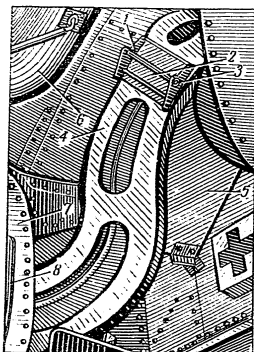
View of Rear Part of Rigid Chute and Ammunition Box
